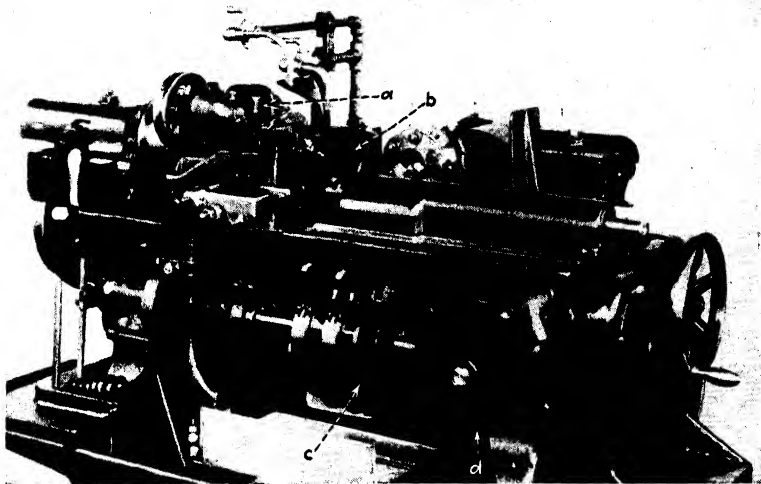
Screw-slotting attachment. (*Brown and Sharpe.*)
